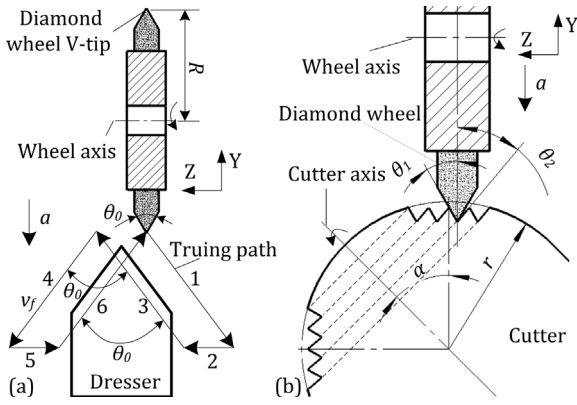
Micro-grinding of micro-cutting-edge array on ball cutter surface using a diamond wheel V-tip: form-truing (a) and micro-grinding (b).
